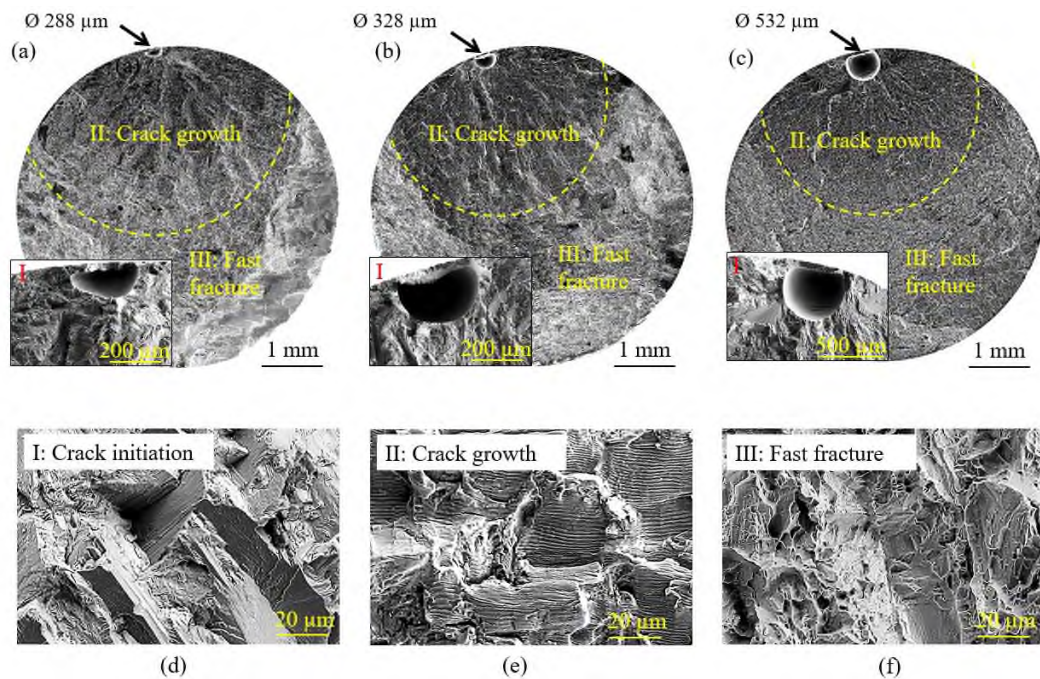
SEM image of fatigue fracture surface of: (a) Specimen 1, (b) Specimen 2, (c) Specimen 3, with enlarged view of the crack initiating pore at bottom left corner (note the different scale bars in the enlarged porosity image), crack path morphology at: (d) initiation region (transgranular facets), (d) rapid crack growth region (striations) and (e) fast or final fracture region (dimples).
